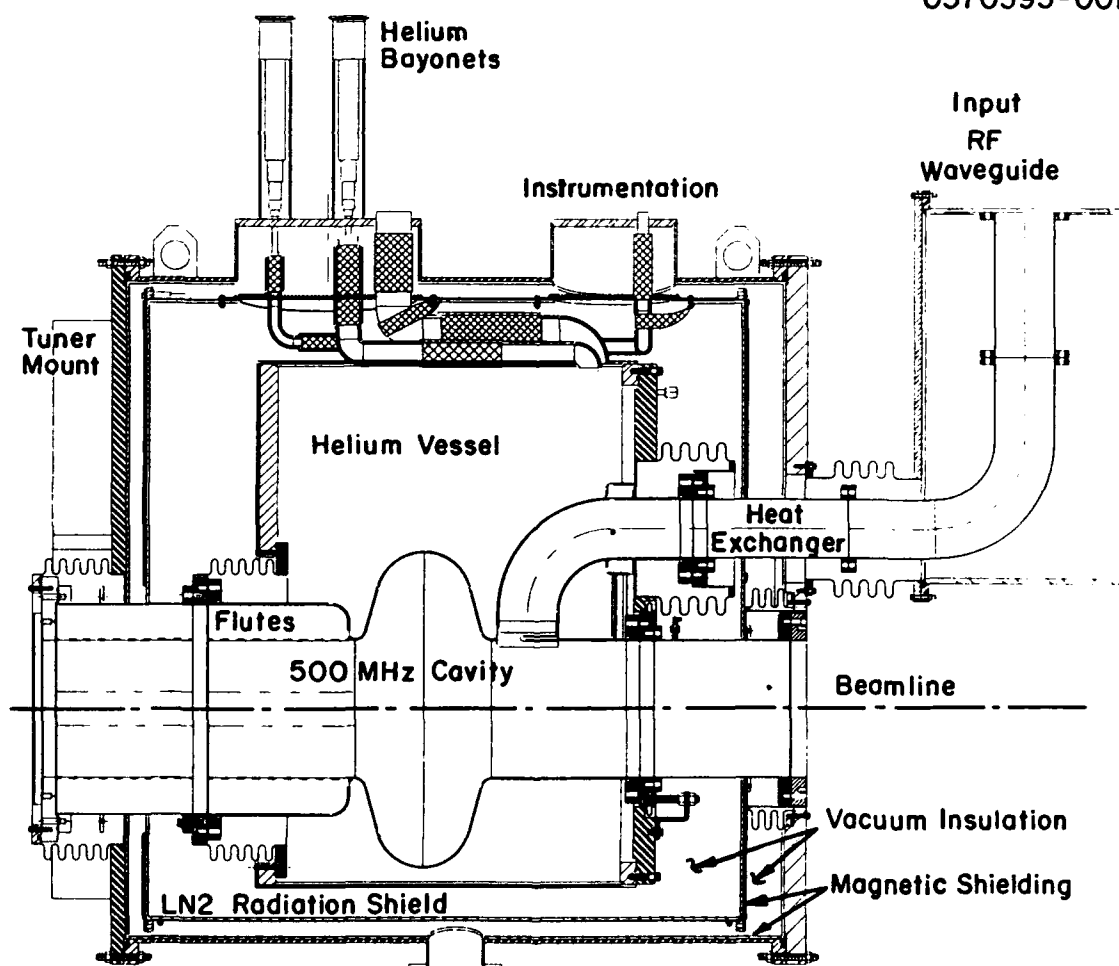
Assembly Drawing (Elevation) of the Cryostat for the CESR-B Cavity
